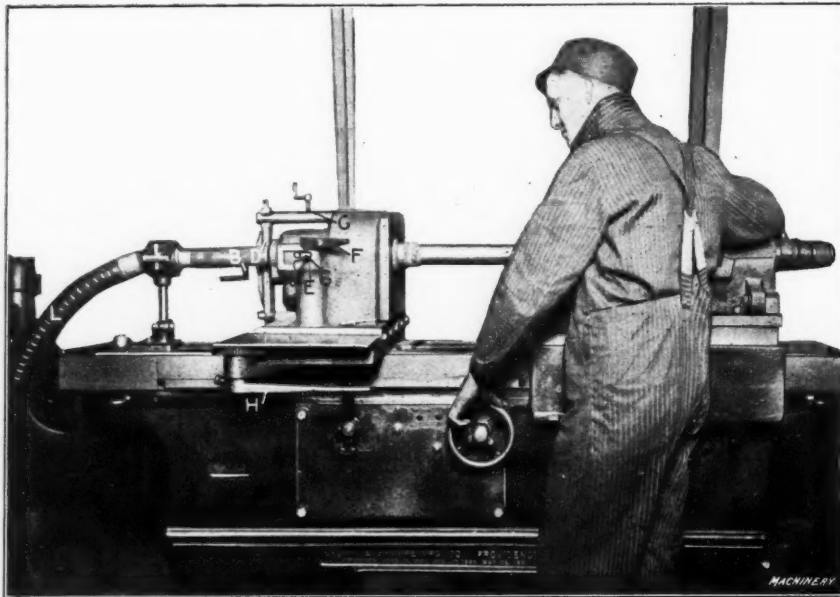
Finish-grinding Cylinder Bores in Brown & Sharpe Cylinder Grinding Machine
